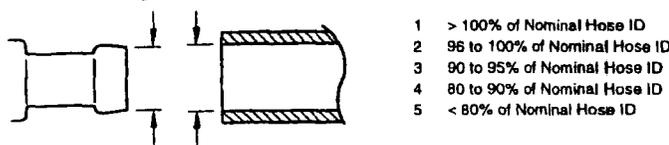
HOSE ASSEMBLY—LEAD END DIAMETER OF FITTING
